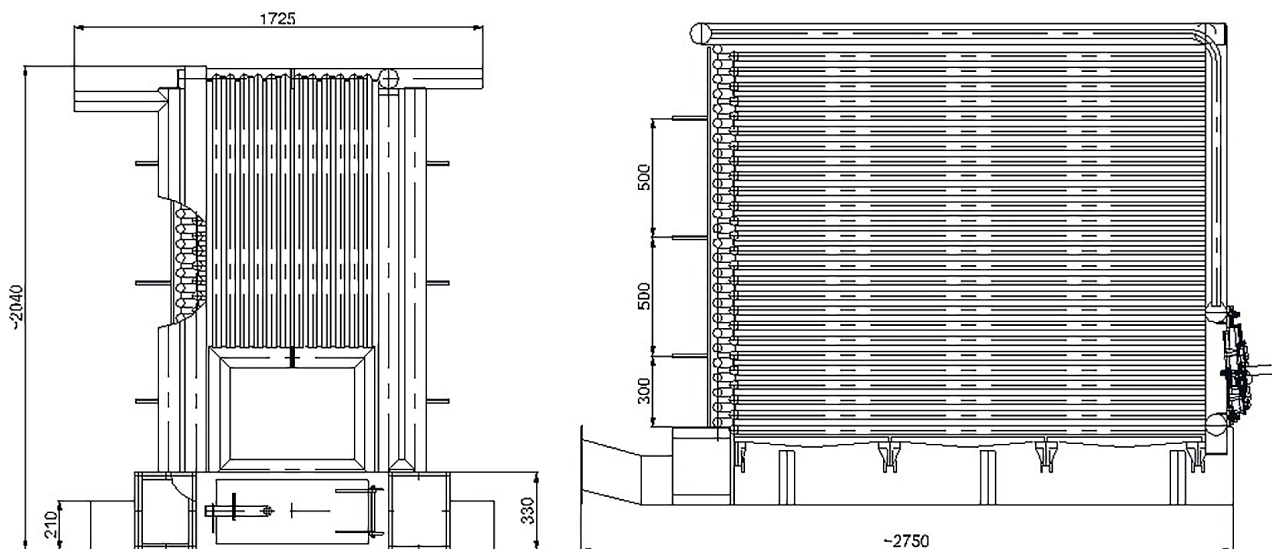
Frontal view of a hot water boiler with a manual furnace for solid fuel combustion (left) and longitudinal section of the boiler (right)
